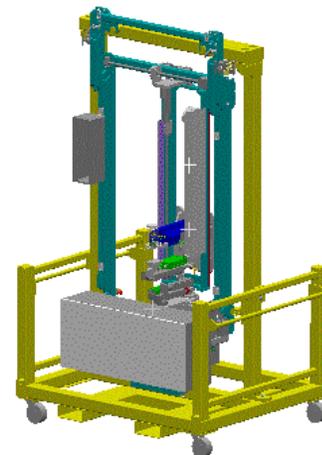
Transport Mechanical Equipment (TME) with 5-axis Numerically Controlled Drill Jig (NCDJ).
